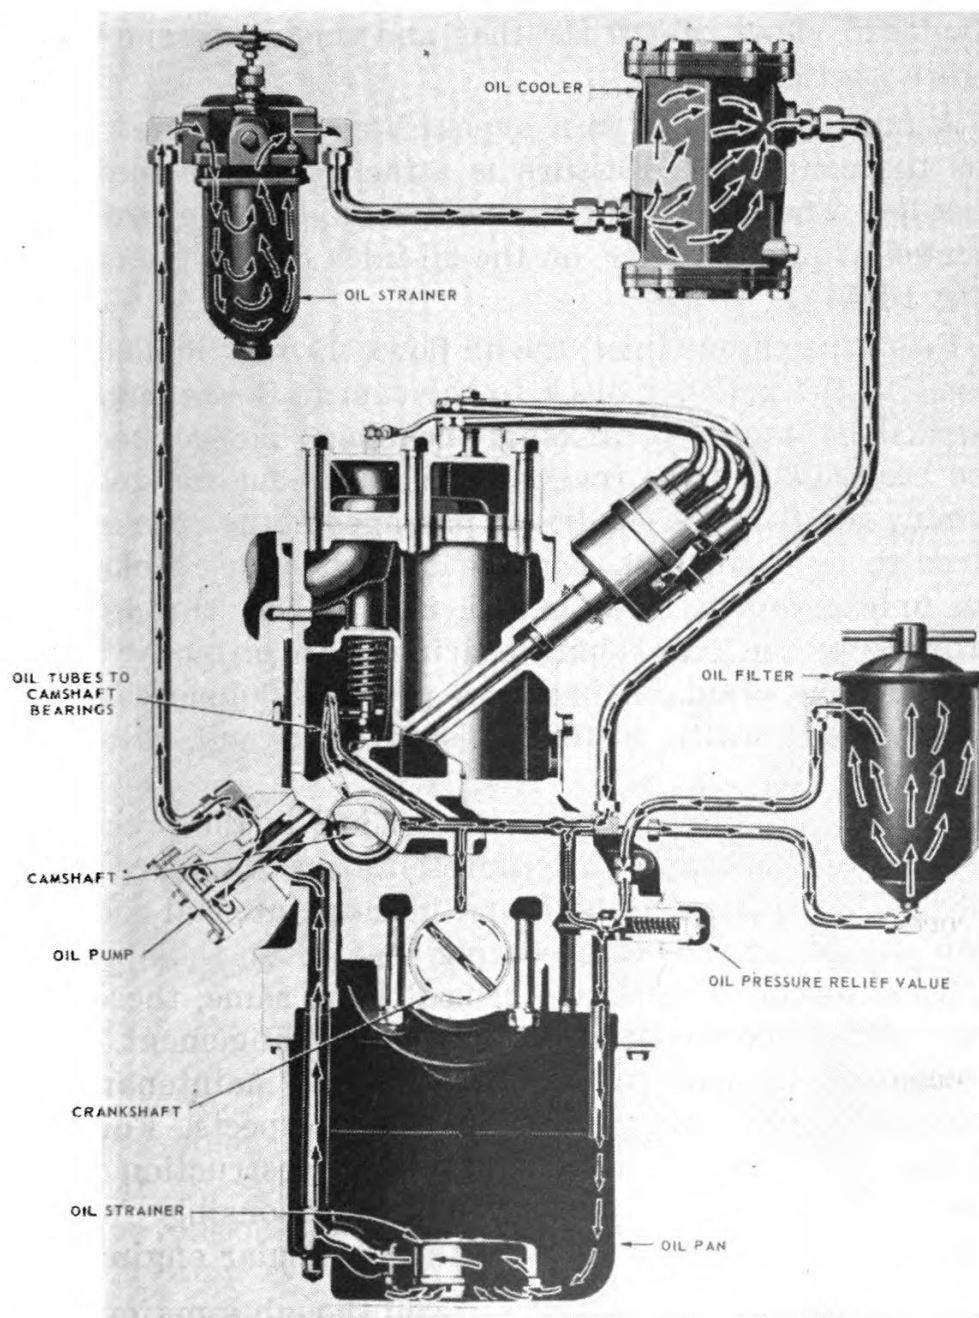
The lubricating-oil system of a gasoline engine (Chrysler M-8).
